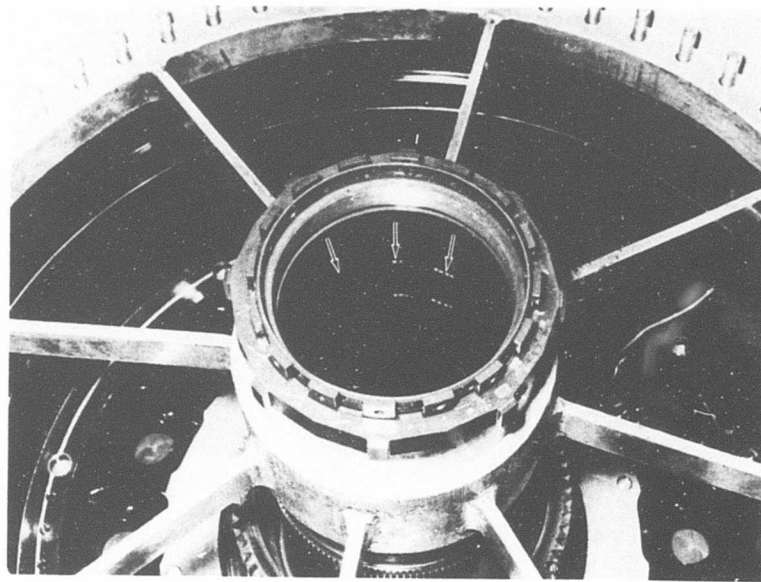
Main Rotor Shaft Roller Bearing Inner Race Temperature Indicators.
